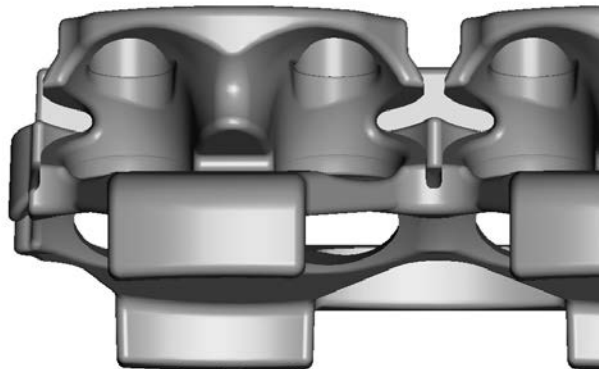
Cylinder Head Coolant Jacket Geometry (Hancock, et al [48])
